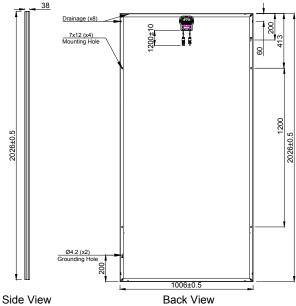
Mechanical drawing of the SIL NT and SIL MT modules showing the mounting holes, the drainage holes, and the ground connection holes.
